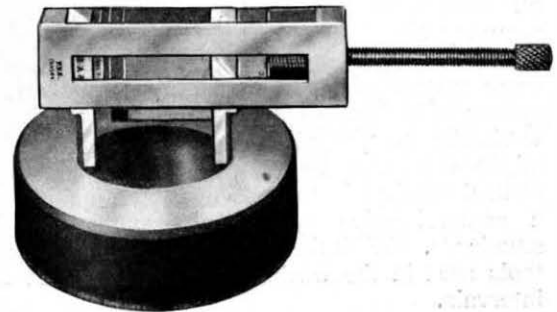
TESTING SIZE OF RING GAUGE WITH SLIPS AND JAWS.
